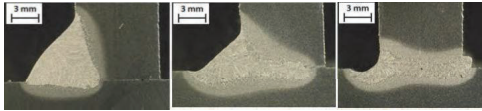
Cross-sections of left: arc weld, middle: hybrid laser arc weld and right: laser weld made with comparable line energy.
